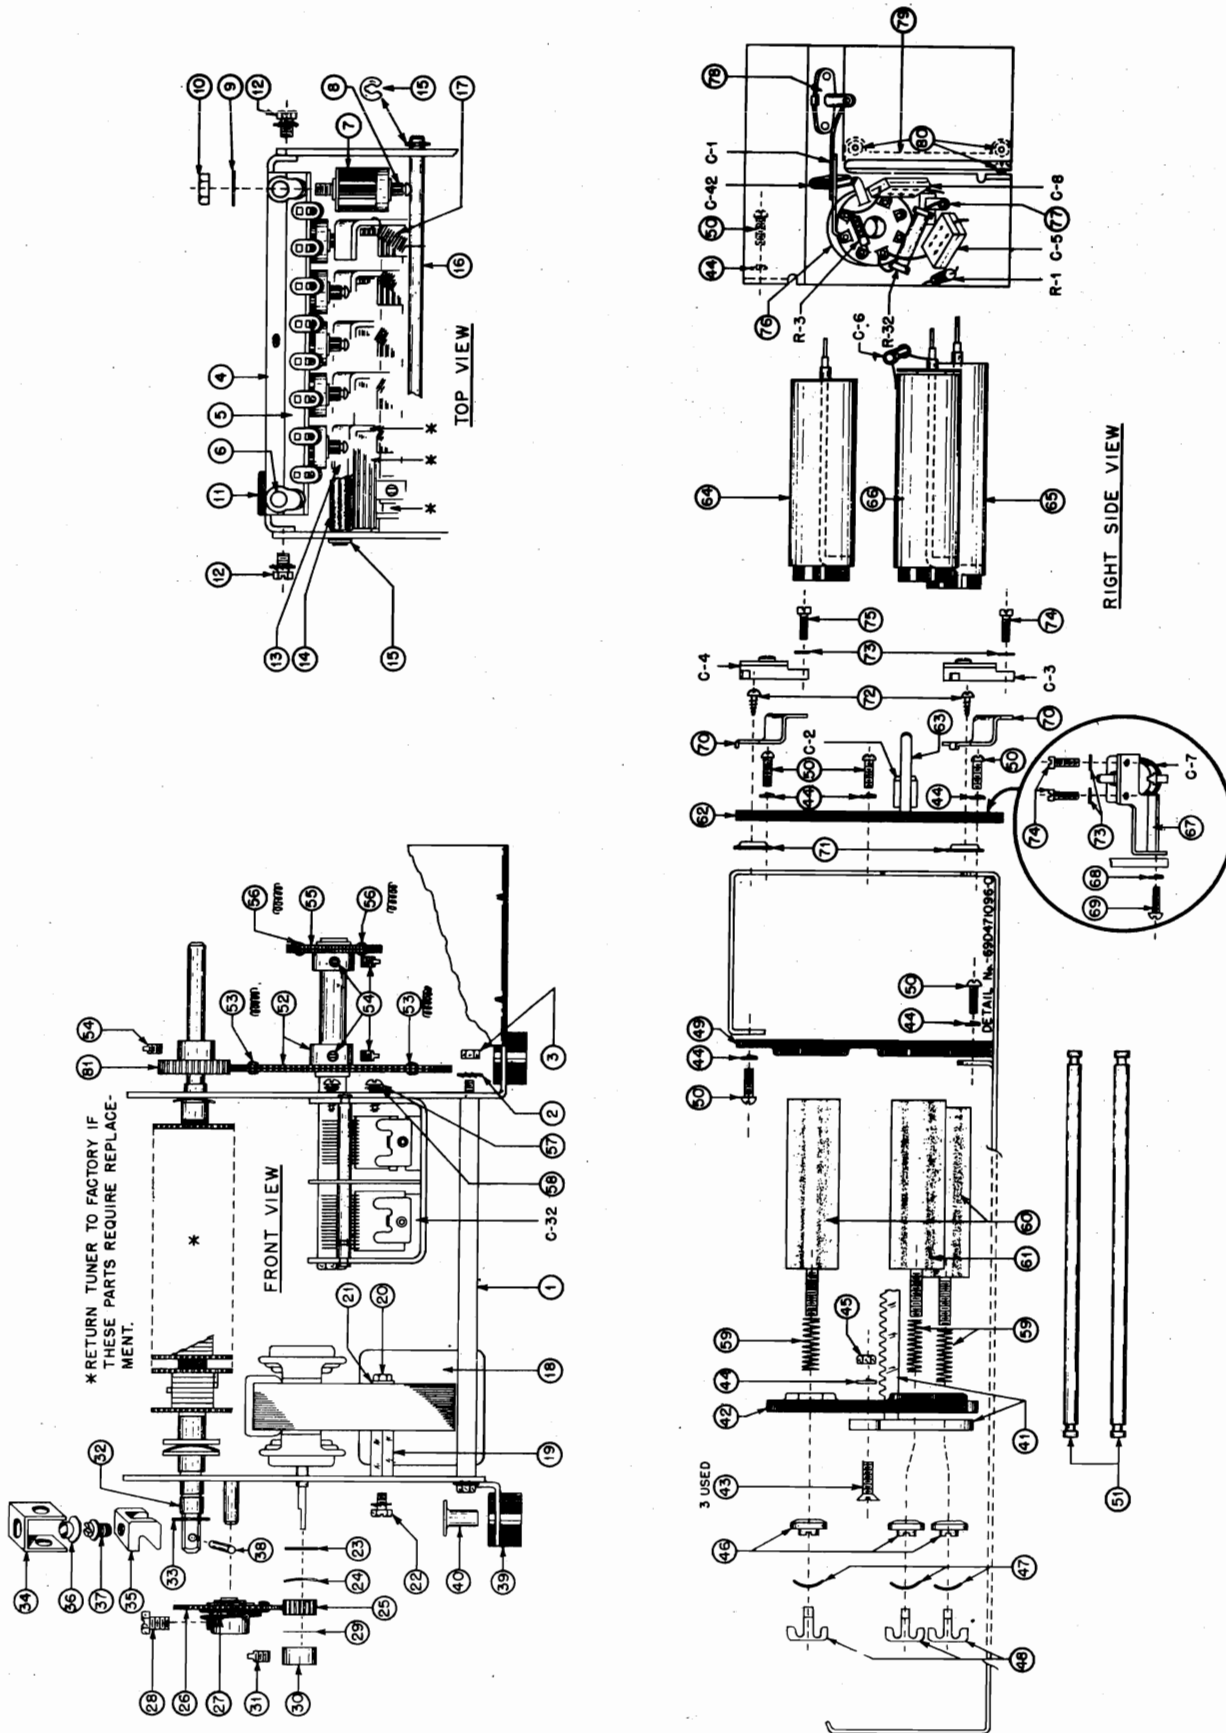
MODEL E-33-T FM-AM TUNER PARTS LOCATION
